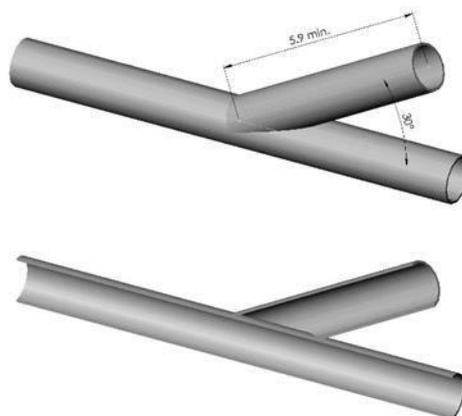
Roll Cage, Welding Sample 2
